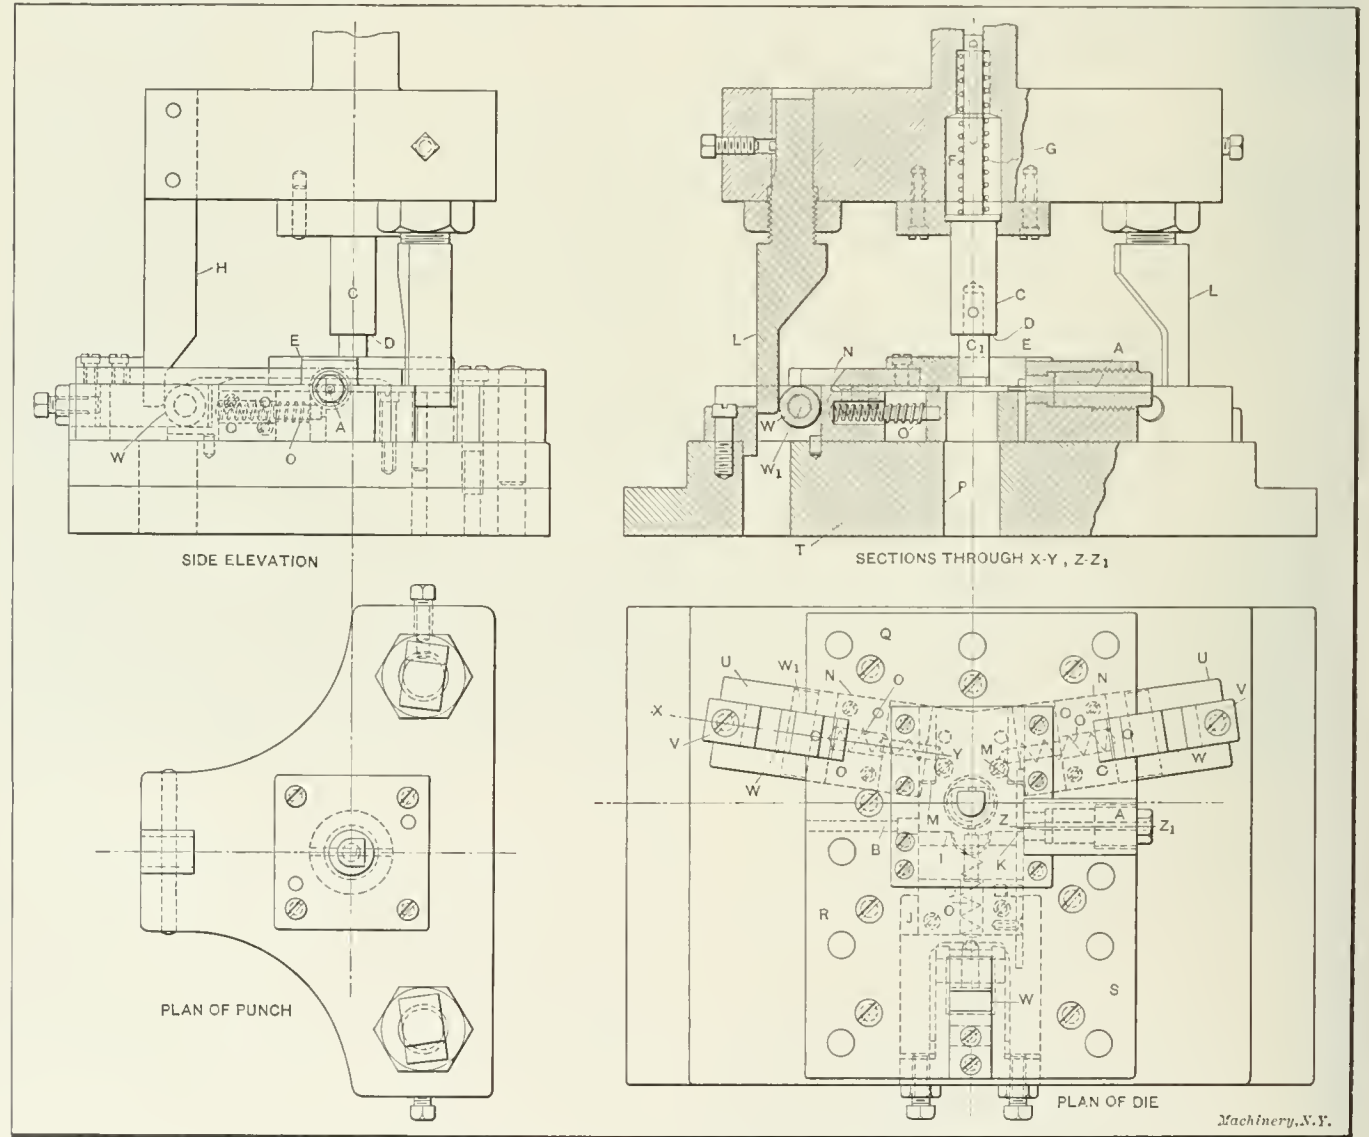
Punch and Die for Cutting off and Forming the Ring
